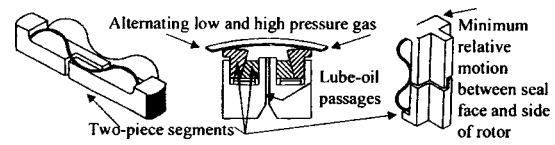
Illustration of sealing arrangements: (a) left, disk end (center flat) surface to center housing; (b) center, disk tip (circumference) to outside-diameter housing; and (c) right, 6 to 12 radial seals on disk surface to flat end plate
